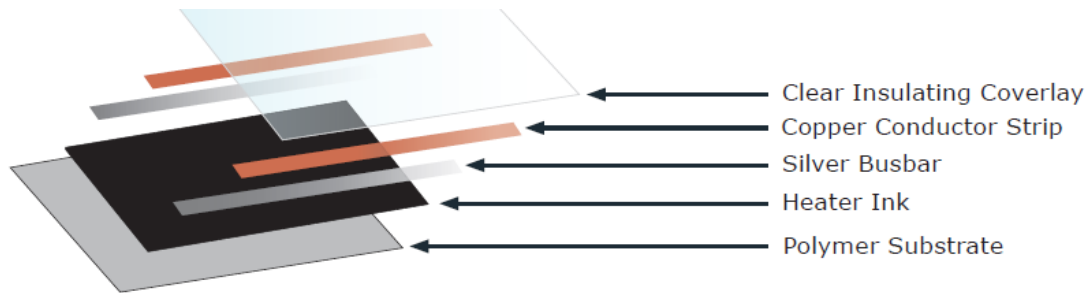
Exploded diagram of JustHeat Underfloor heating panel
